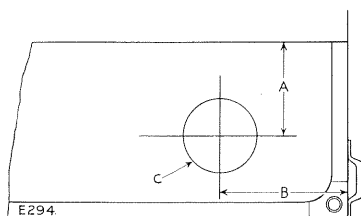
Position of hole in L.H. rear wheel arch box—88 models
